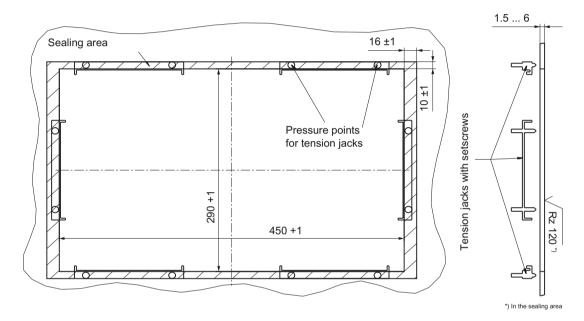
Dimension drawing for mounting the OP010C operator panel front
